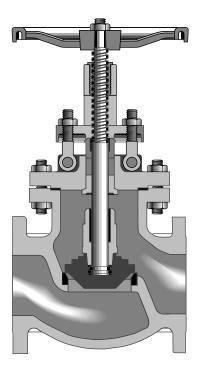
Flanged Figure 171^{1/2} Butt Weld
